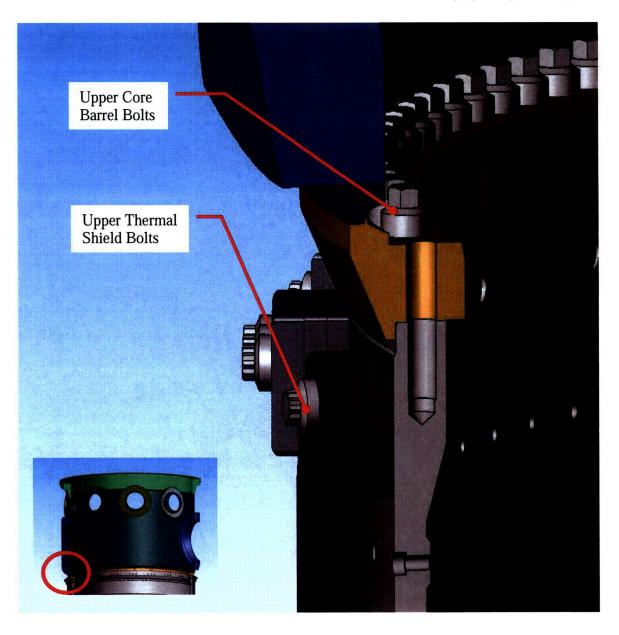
Typical upper thermal shield bolts and upper core barrel bolts for B&W-designed PWRs
